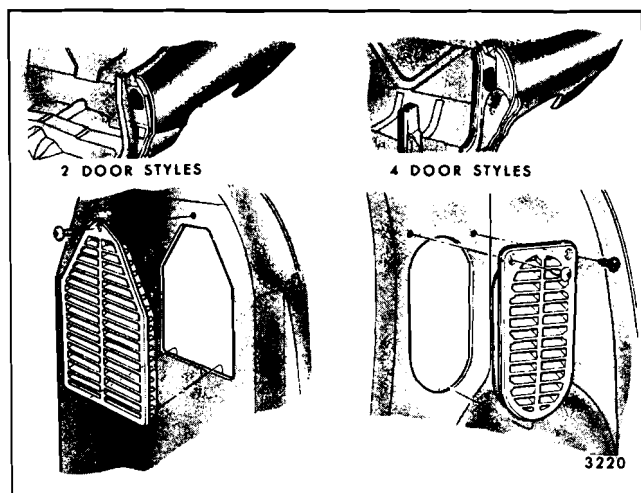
Pressure Relief Valve - "A" Styles Shown
